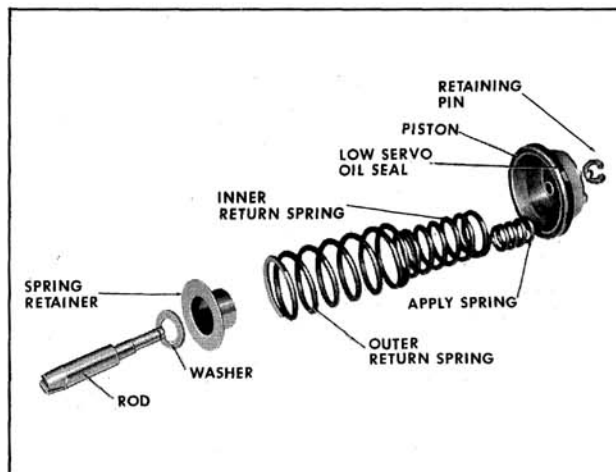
Low Servo Piston Assembly (Exploded)
